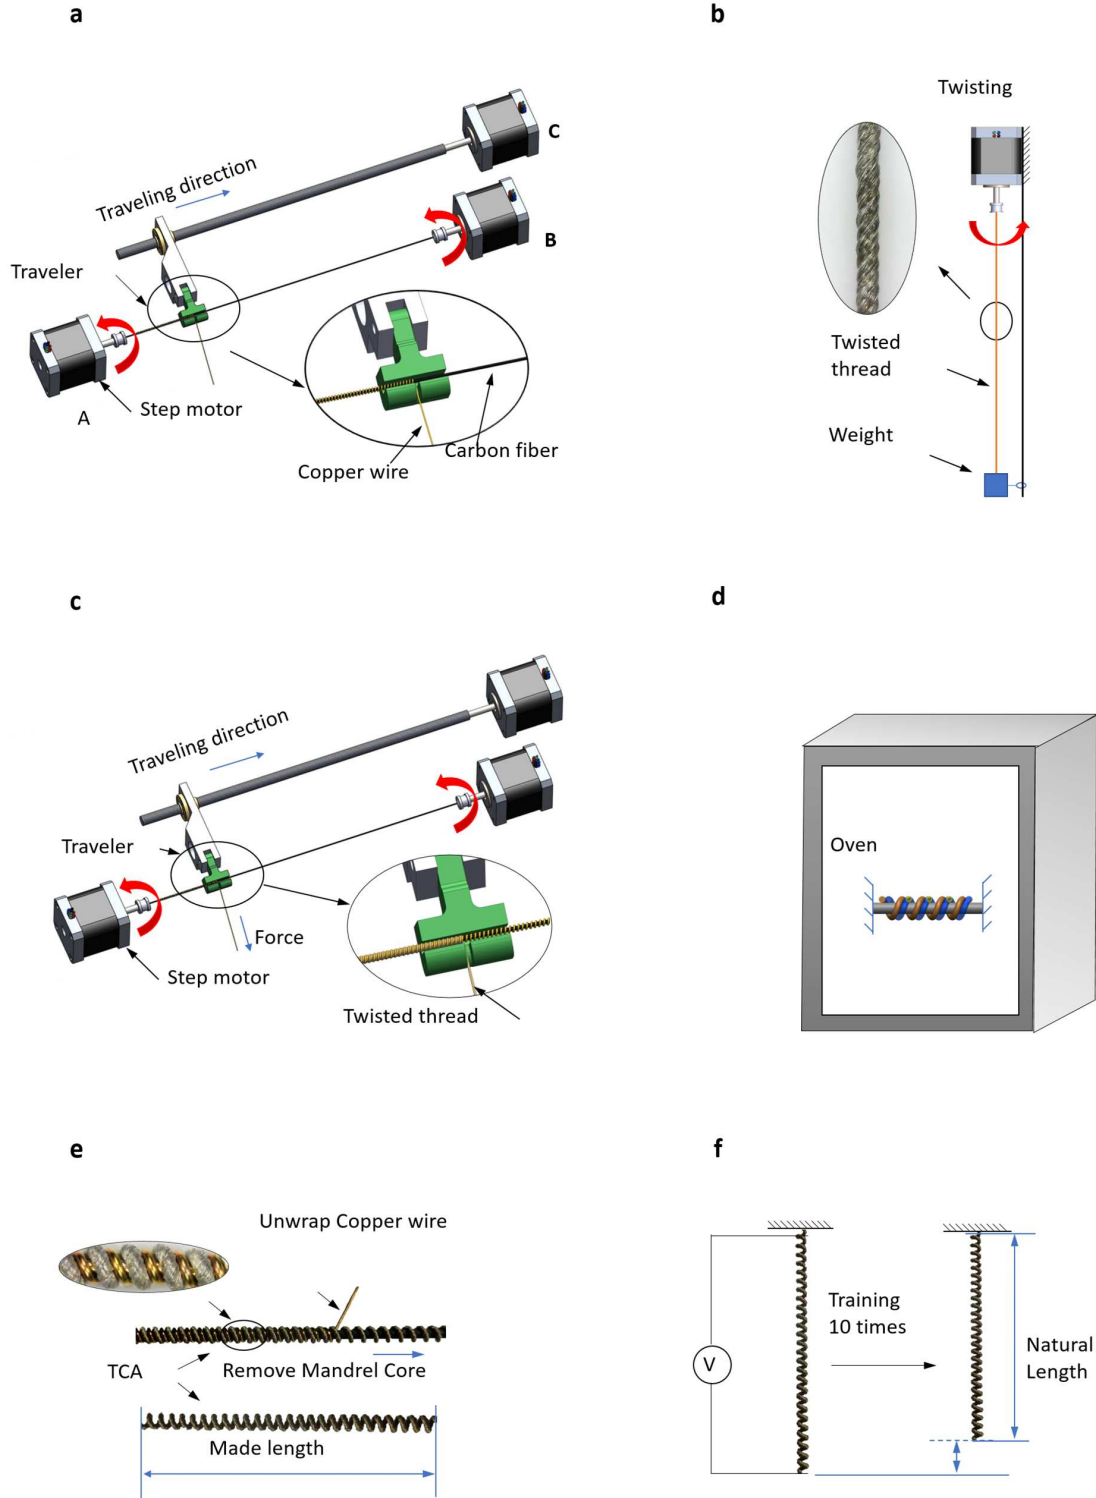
The fabrication process of TCAs with free strokes. (a) Make the helical mandrel on the machine. (b) Twist a thread. (c) Coil the twisted thread in the groove on the helical mandrel using the machine. (d) Anneal the TCA with the mandrel. (e) Remove the TCA from the mandrel. (f) Train the TCA to get a reversible free stroke.
